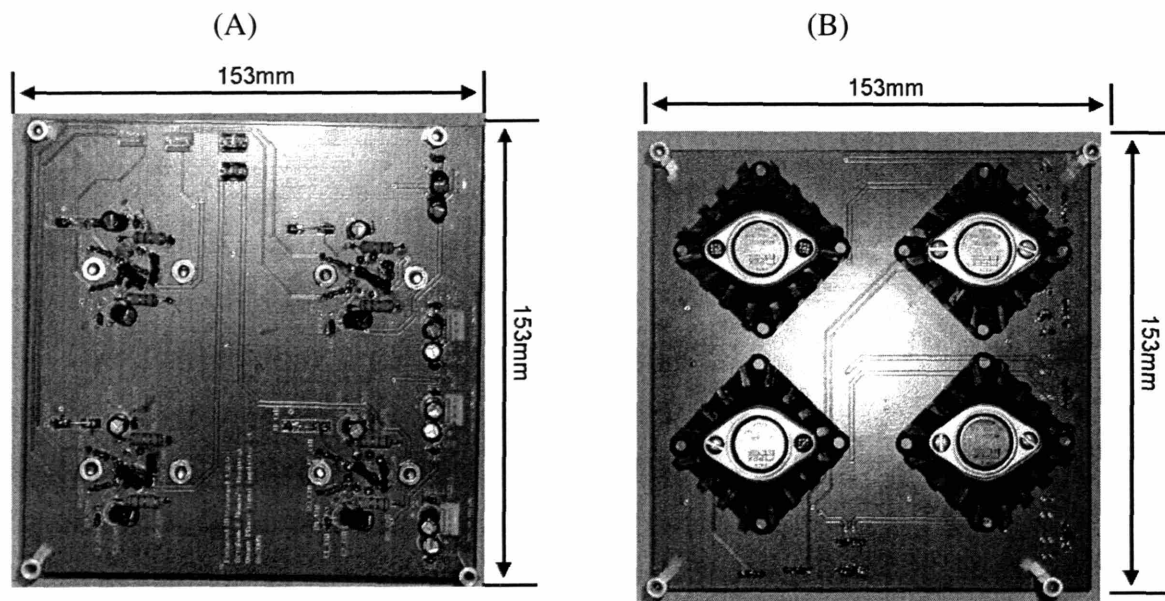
A photograph of the HDAADS input phase amplifier PCB. (A) Top View (B) Bottom View
